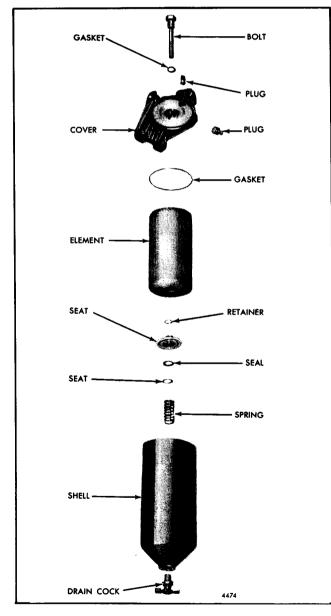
Fuel Strainer Details and Relative Location of Parts
